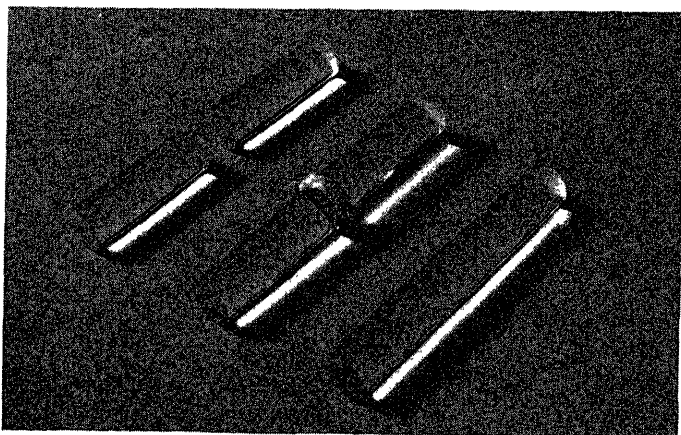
Acrylic rods at bottom have been heat welded—there is no visible evidence of weld line.
